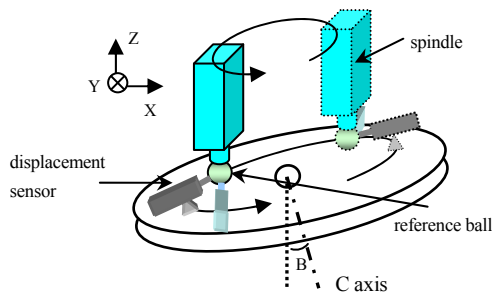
Scheme for measuring motion accuracy of C-axis by displacement sensor
